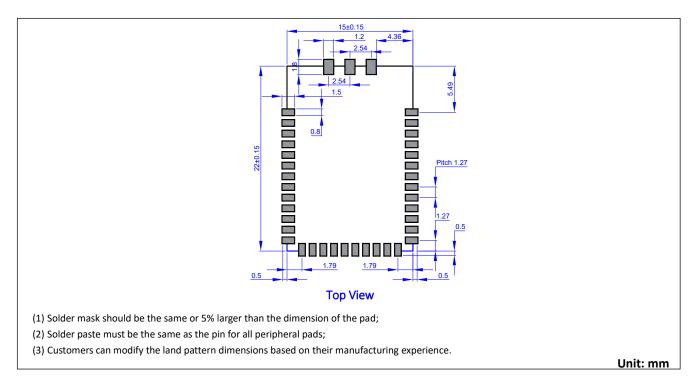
Recommended Module Footprint of BDE-SG1314R10
